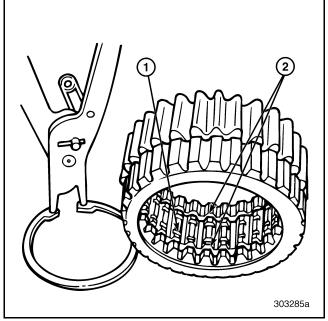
Removing Remaining Gear Snap Ring (T313L/T318L Shown)
